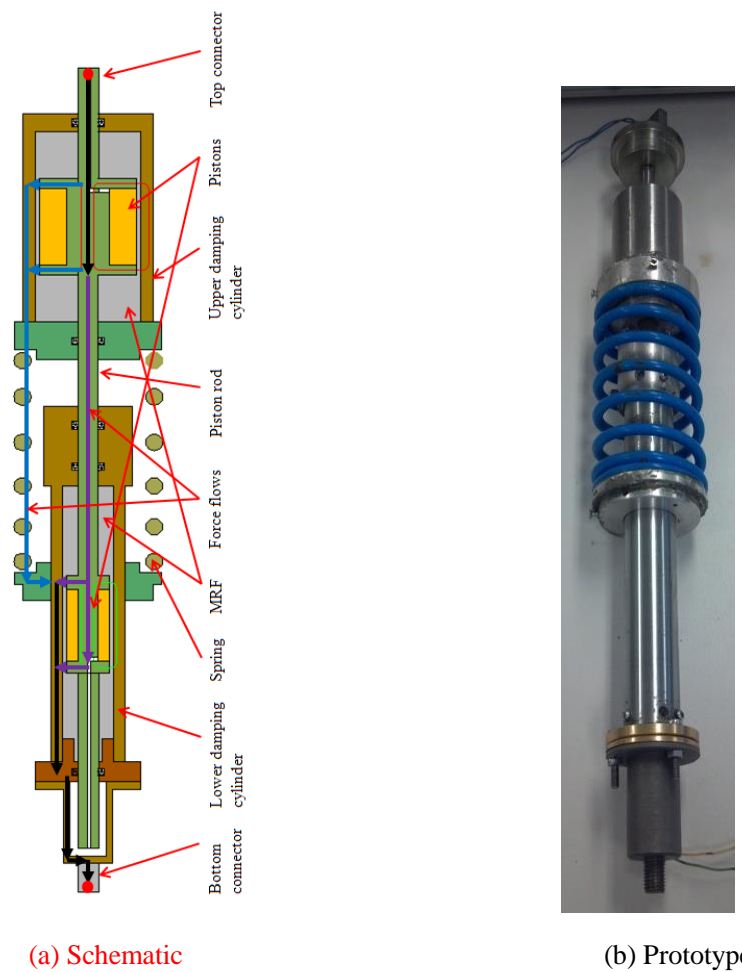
Design drawing and prototype of the MRF damper: (a) schematic; and (b) prototype.
